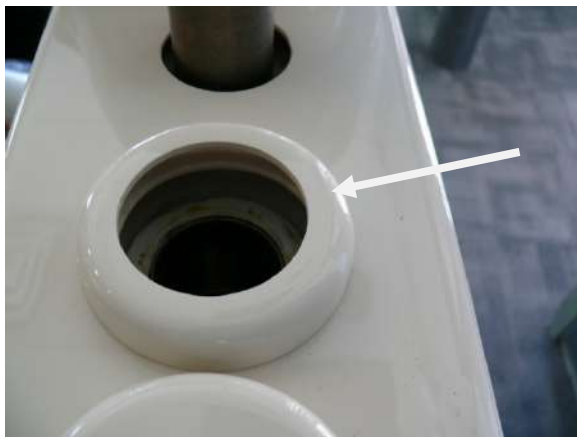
Install the large plastic ring on the side box. Feed the tube/cable bundle through the ring and into the side box. Tie the treatment tray flex arm to keep it from moving while you lift the assembly.
